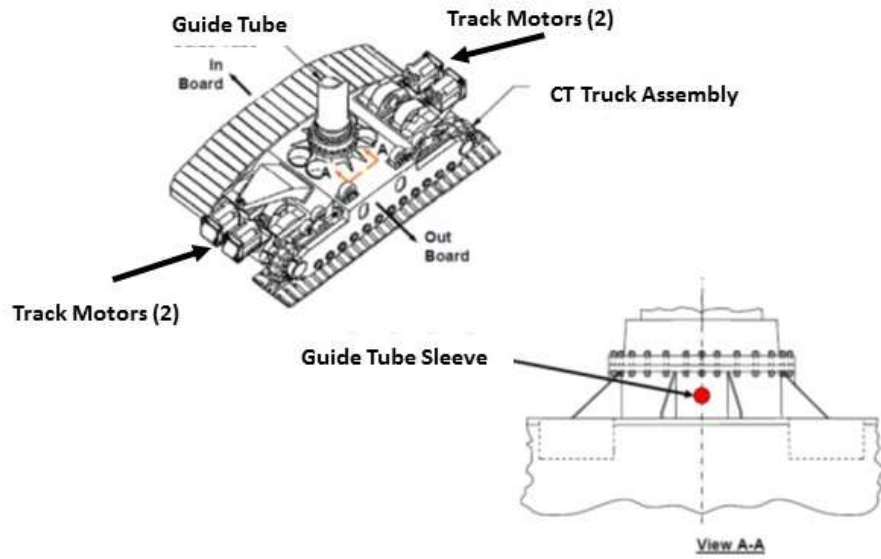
Crawler-Transporter (CT) Drive Motors and Guide Tube Systems Identified
